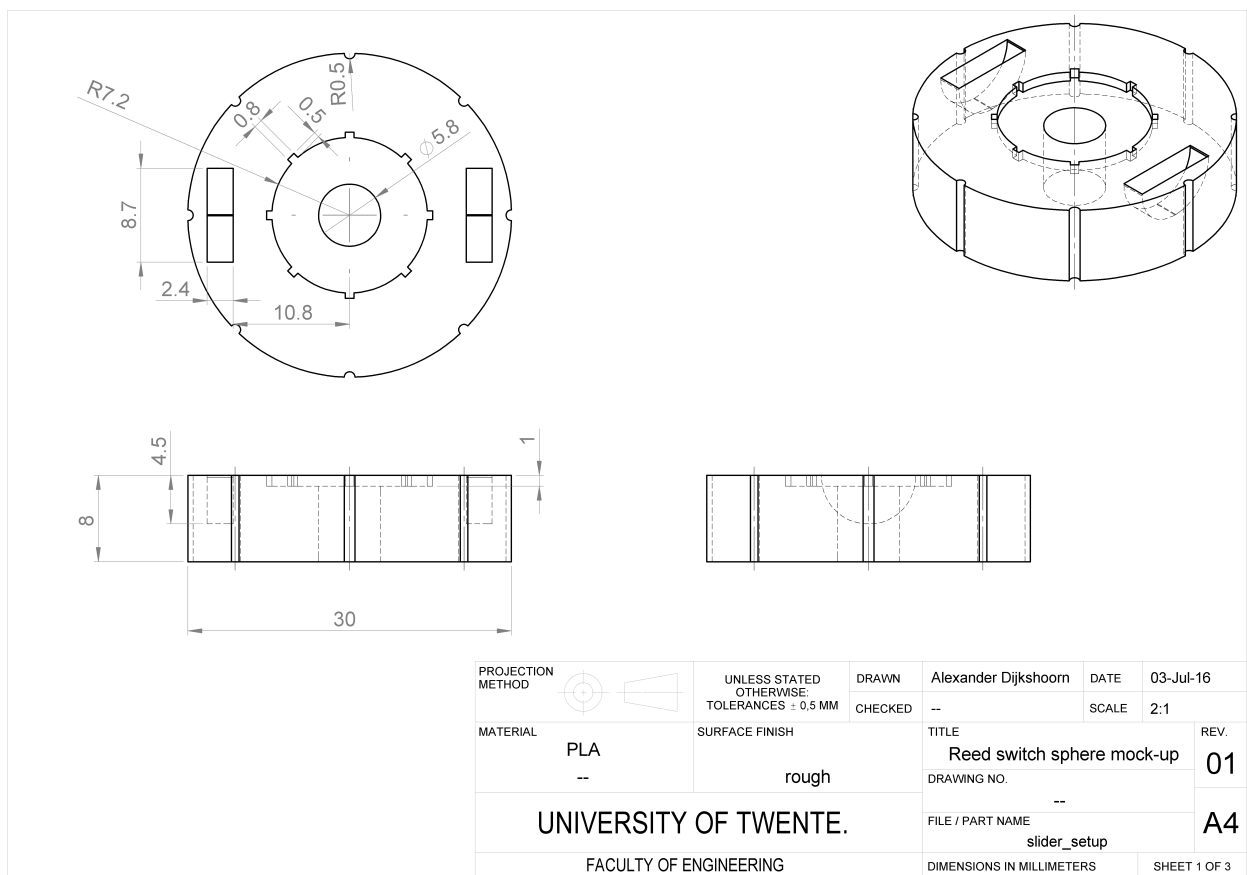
Technical drawing of the sliding holder for the reed switch experiment.
